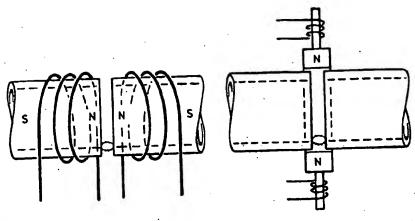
Schematic of the typical placement of magnets for propelling the arc in MIAB welding. (From "Magnetically Impelled Arc Butt Welding: Development and Applications" by P. Hone, in *Proceedings of Sheet Metal Welding Conference III*, organized and sponsored by the Detroit Section of the American Welding Society, 25–27 October 1988, and used with permission.)
